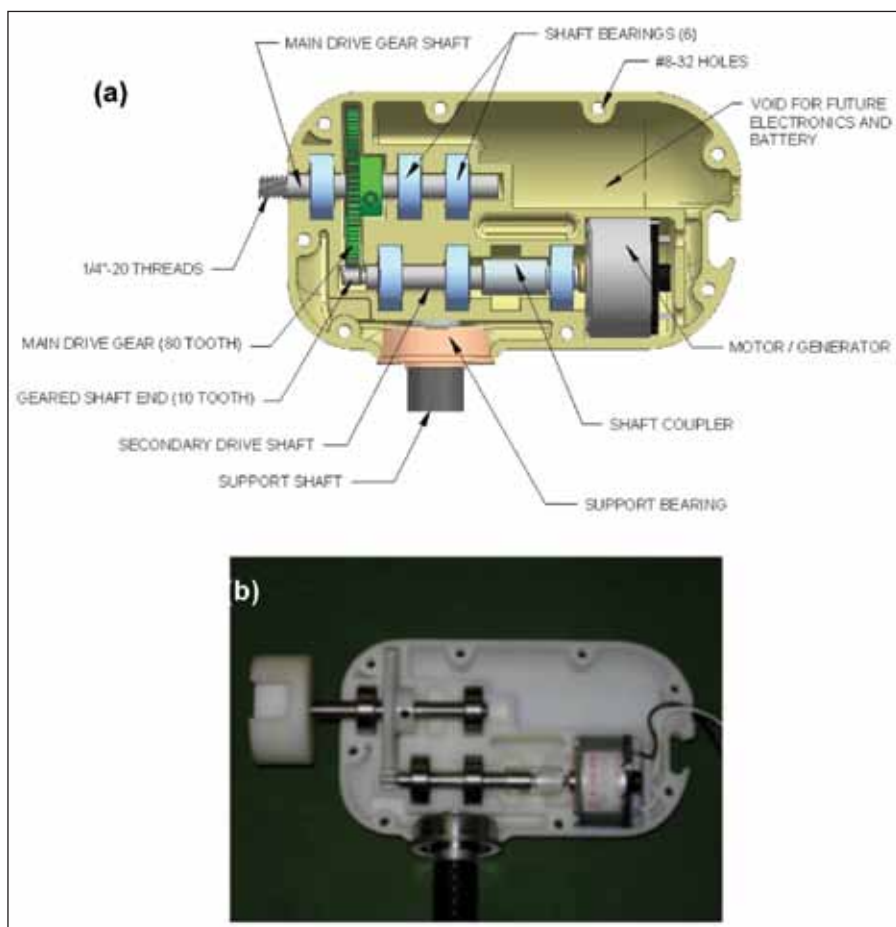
Nacelle subassembly (a) diagram that shows all internal parts and (b) photograph of the fabricated prototype with its integrated dc electric motor.
